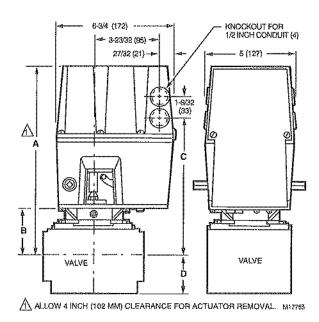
Approximate mounting dimensions of V4055 Actuators in in. (mm).
